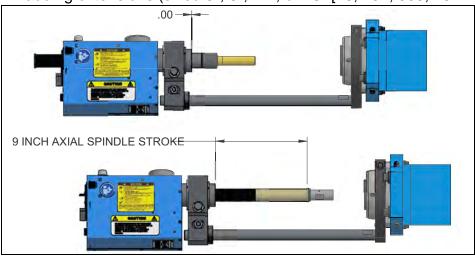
BW2600 AXIAL STROKE DISTANCE SHOWING 9" AXIAL SPINDLE STROKE (LOWER)
